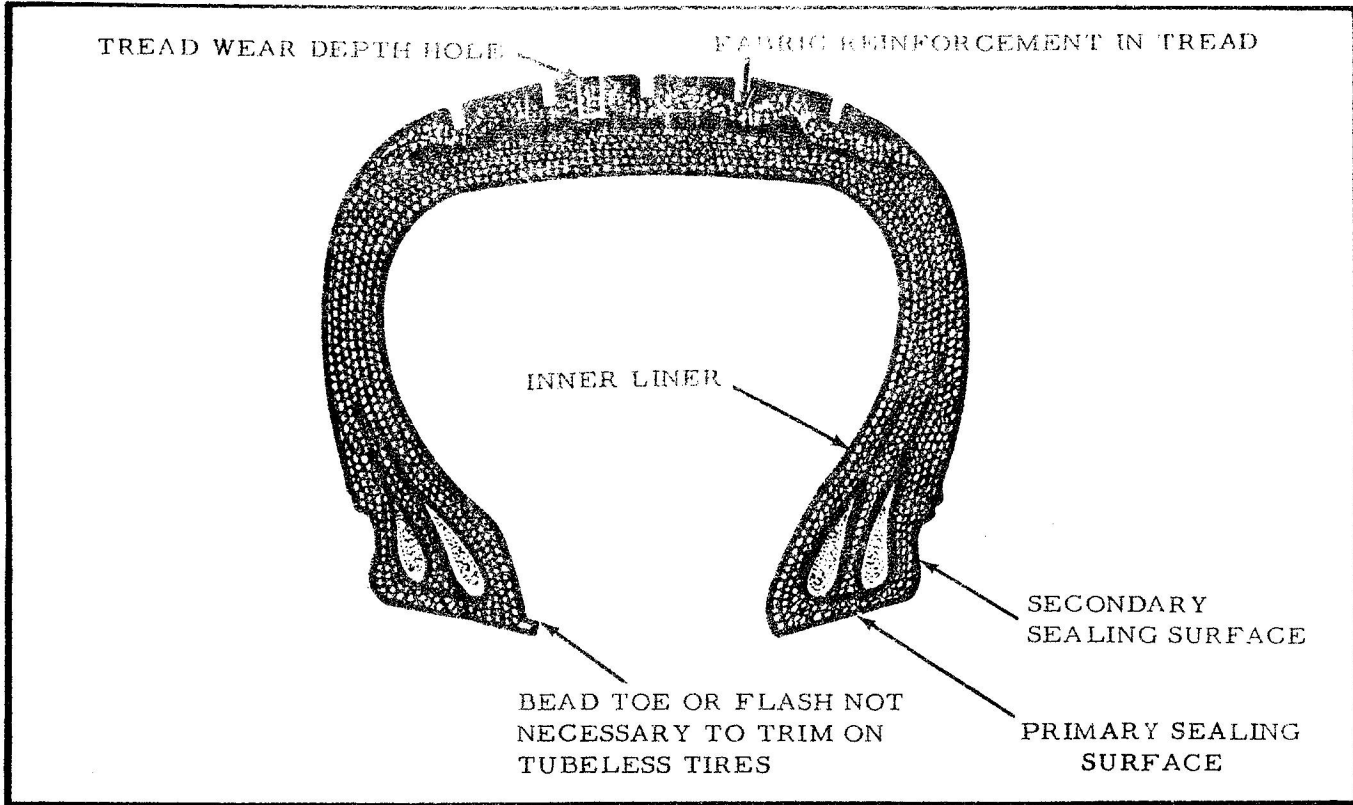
Sectional View of Aircraft Tubeless Tire With Fabric Reinforced Tread Illustrating Tread Wear Depth Hole
